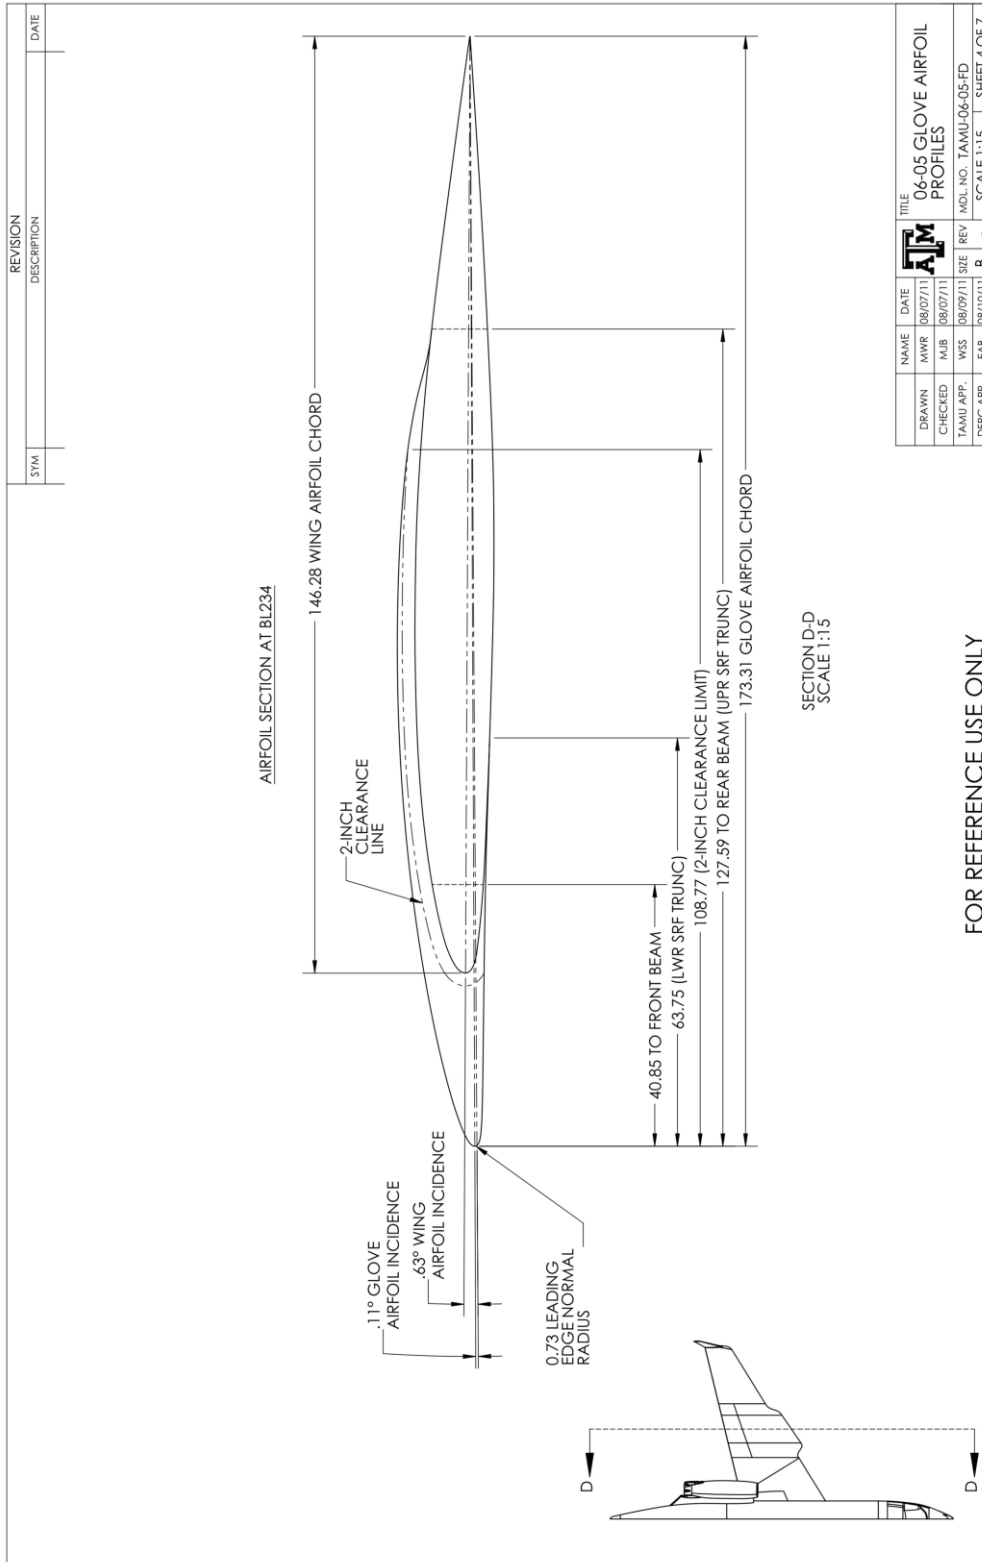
Sheet 4 of the 06-05 Glove Airfoil Profiles drawing: airfoil section at BL234.
